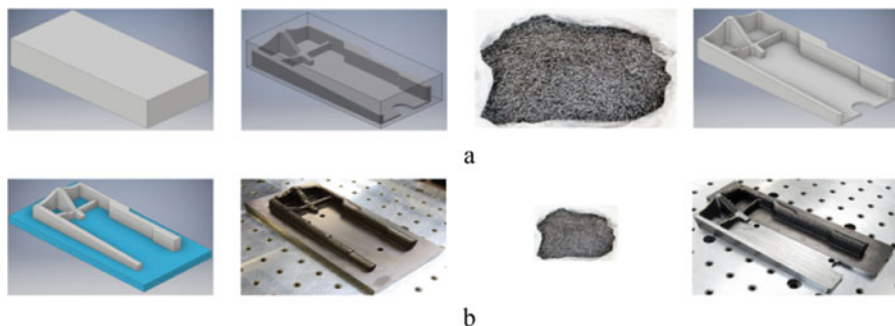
Part manufacturing by using traditional technologies like milling (a) and additive manufacturing (b)
